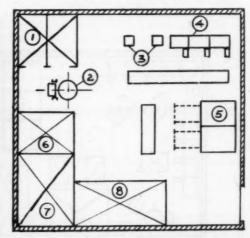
Coreroom layout: (1) sand storage; (2) mixer and bucket loader; (3) coreblowers; (4) core benches; (5) drawer-type ovens; (6) core inspection; (7) core box storage; (8) finished core storage.
